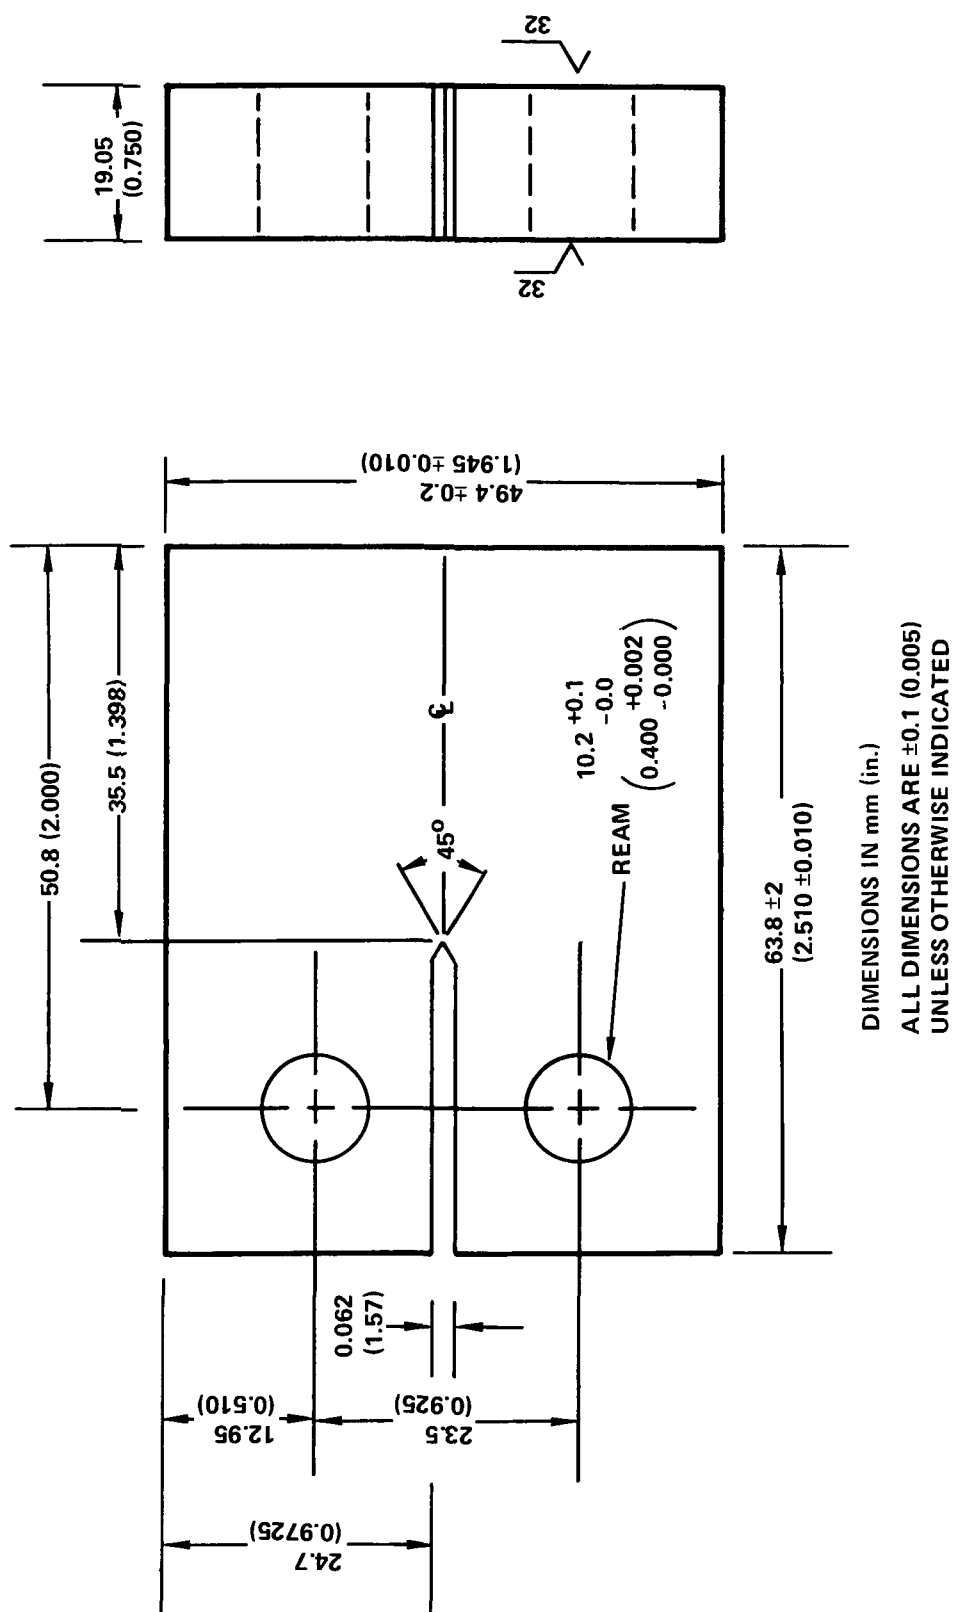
Compact Tension (WOL Type) Specimen Geometry
